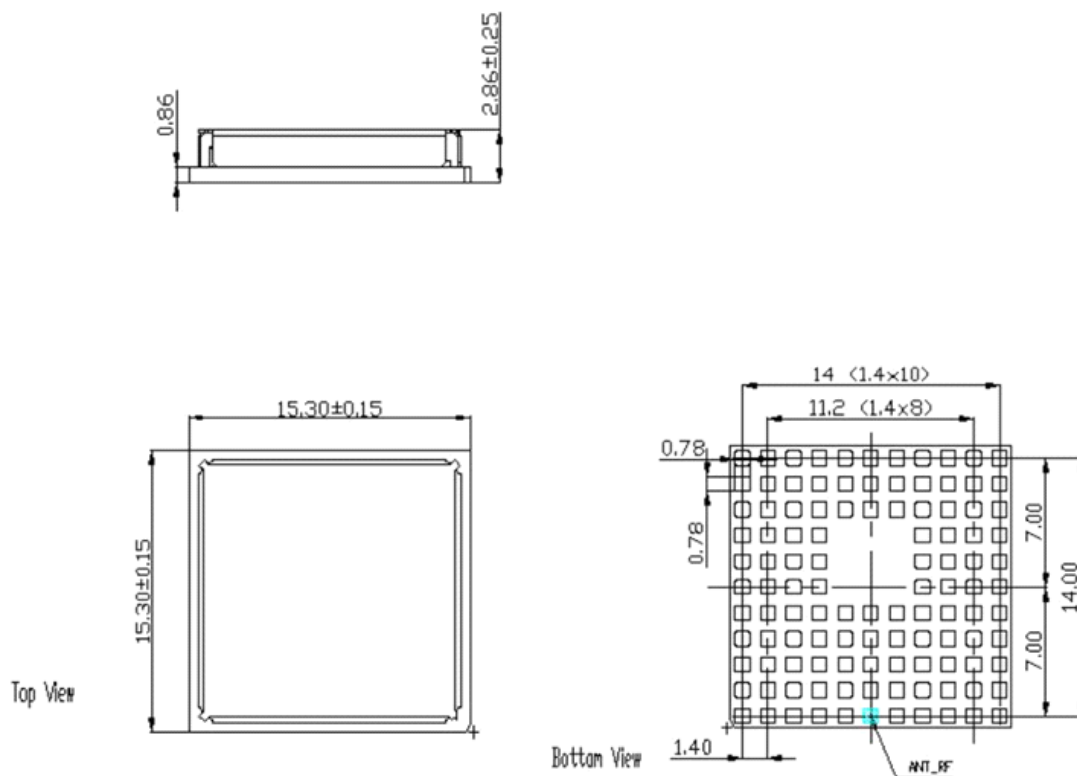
Dimensions of TN23-W (all dimensions in mm)
